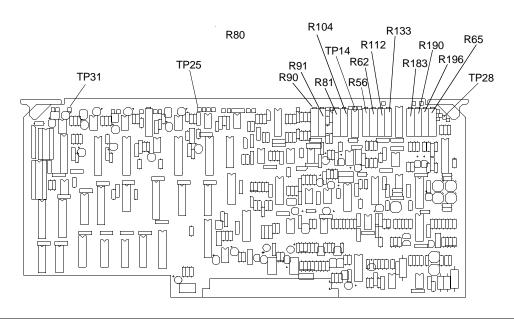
Adjustments and Test Points, A6 ALC/Frequency Instruction PCB (all except 54154A thru 54177A)
